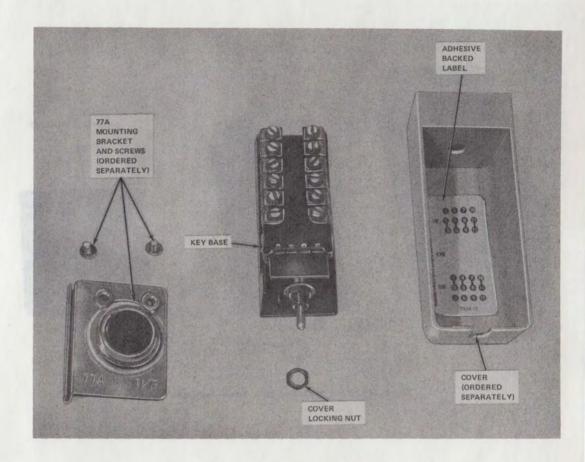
KS-21776 Type Key With Flexible Wiring Strip
